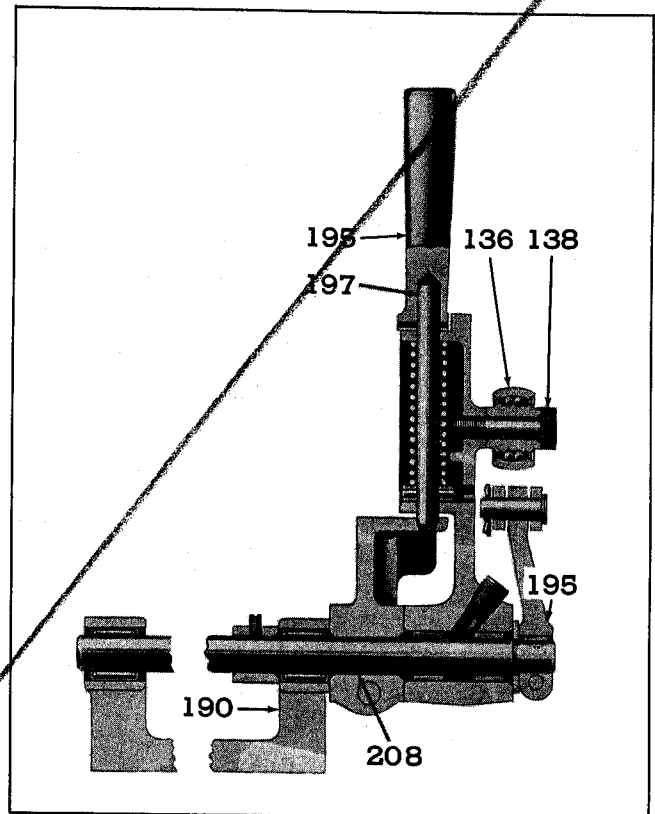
Individual Throttle Assembly on a Tandem Twin Unit.
